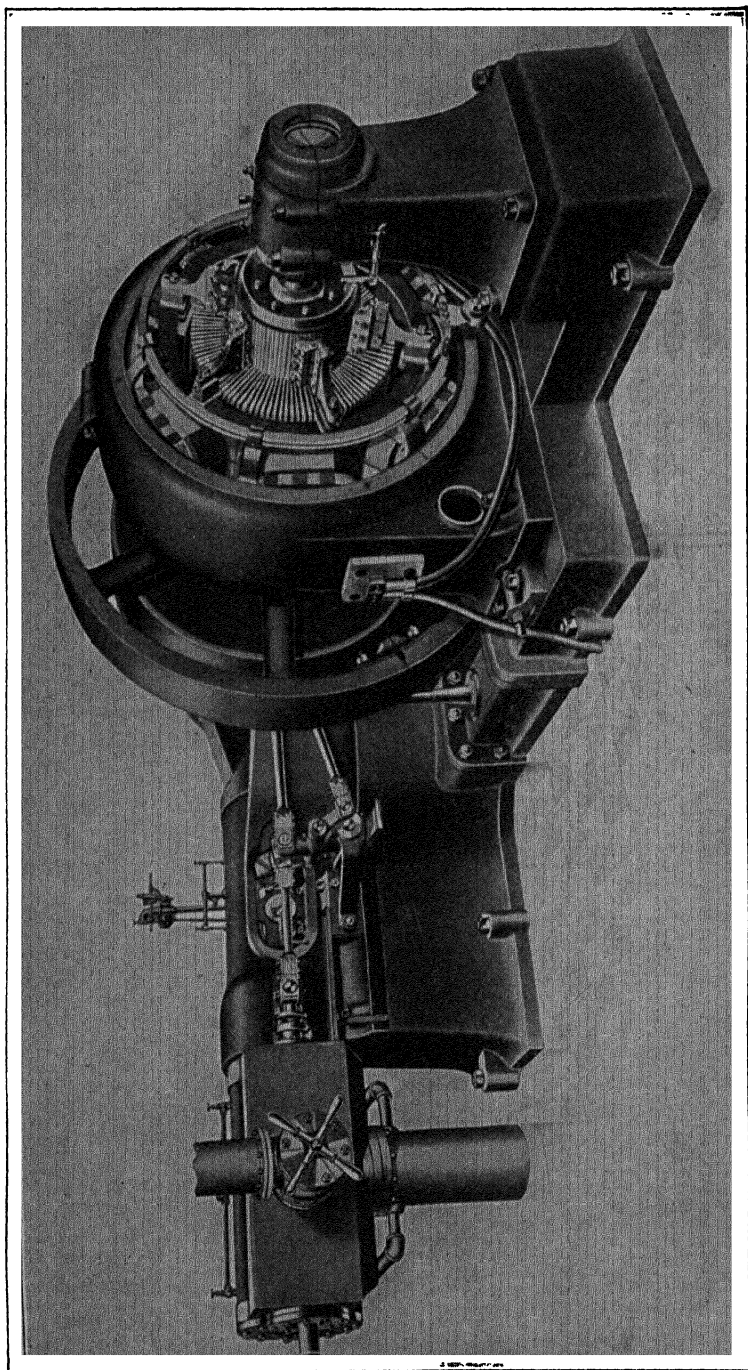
Thompson Automatic Valve Gear Applied to Buckeye Engine
